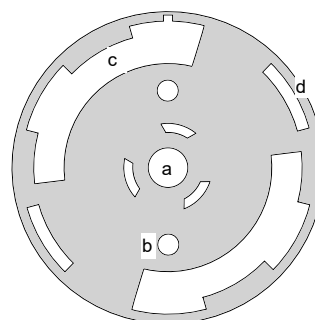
Chopper wheel geometry a) mounting cut-out, b) pump laser openings, c) probe beam openings, d) feedback slots
